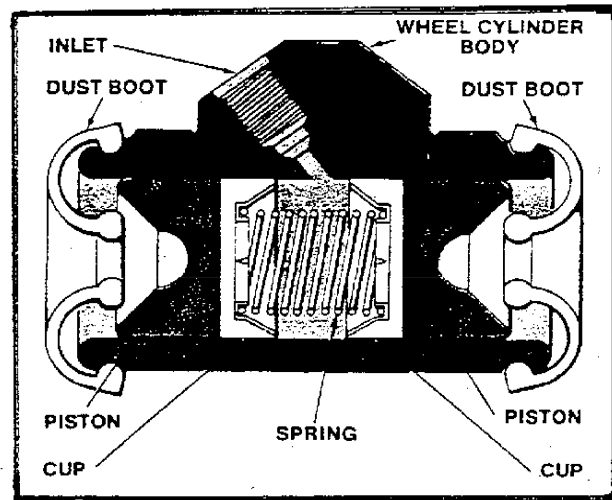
Typical Double-piston, Straight-bore Wheel Cylinder
